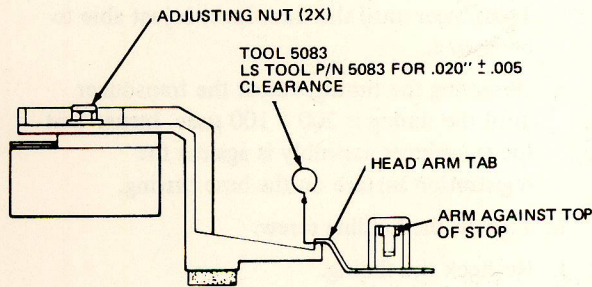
HEAD LOAD ACTUATOR ADJUSTMENT
